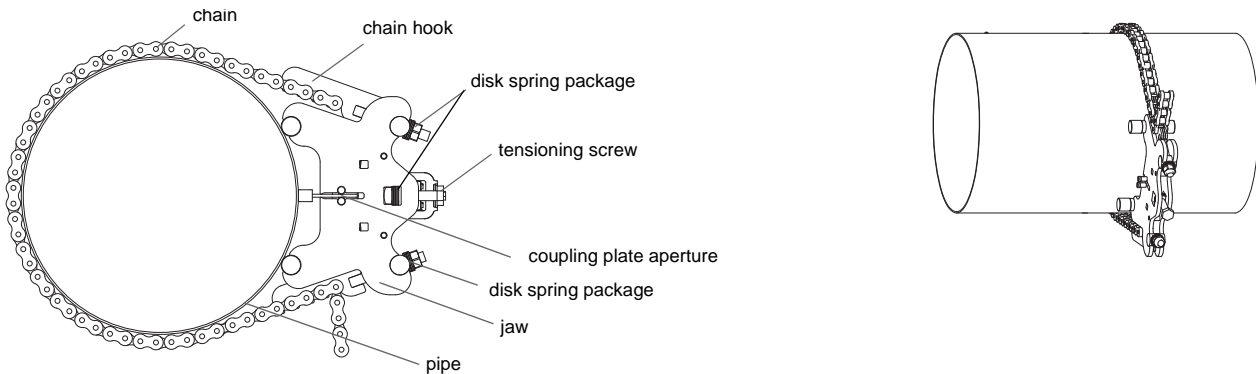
Pipe mounting fixture mounted on the pipe (front view)
